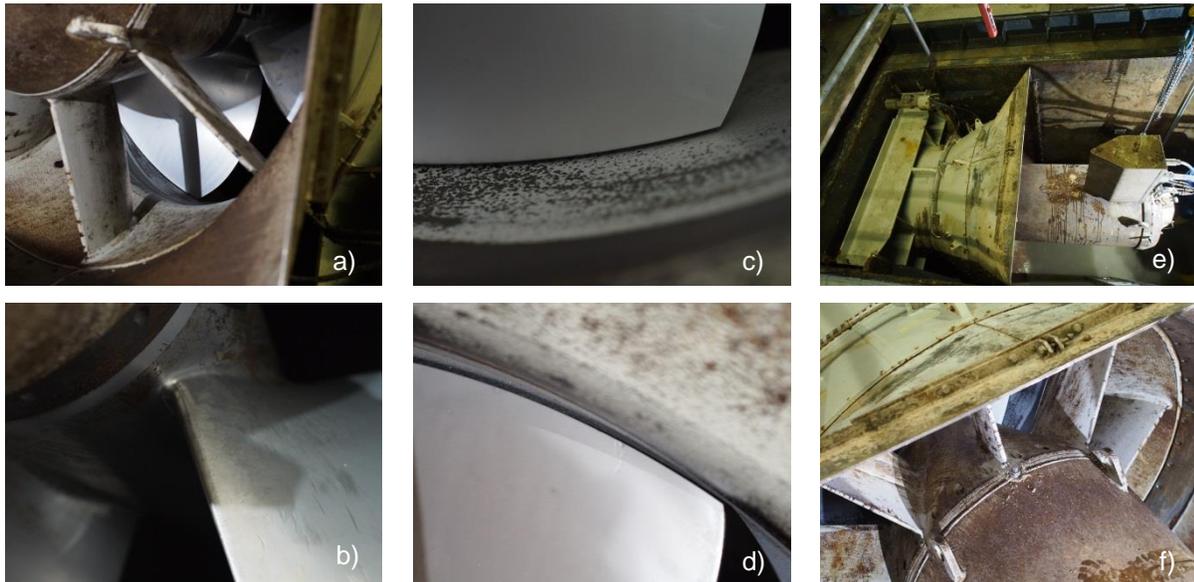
Pictures a) to f) show the overall conditions of the surfaces and components exposed to river water. The runner is in excellent conditions as well as the coated surfaces. Picture e) shows the unit with disassembled front cover and cable cover to get access to the NDE radial bearing and shaft end
